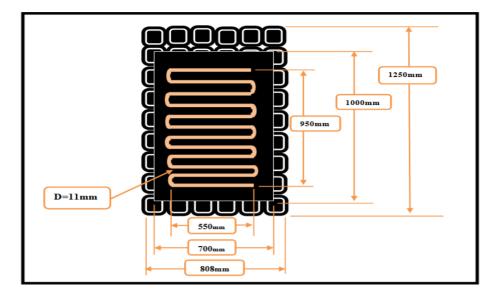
Dimensions of thermal collector mounted on the back side of PV panel
